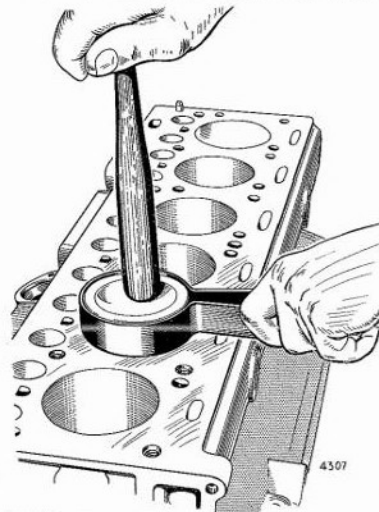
Fitting the piston and connecting rod assembly, using the Churchill Tool R.G.203 to compress the piston rings
